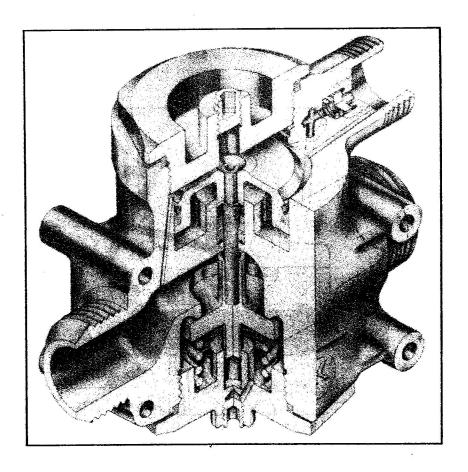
Cutaway View, Solenoid Operated Stop Valve
